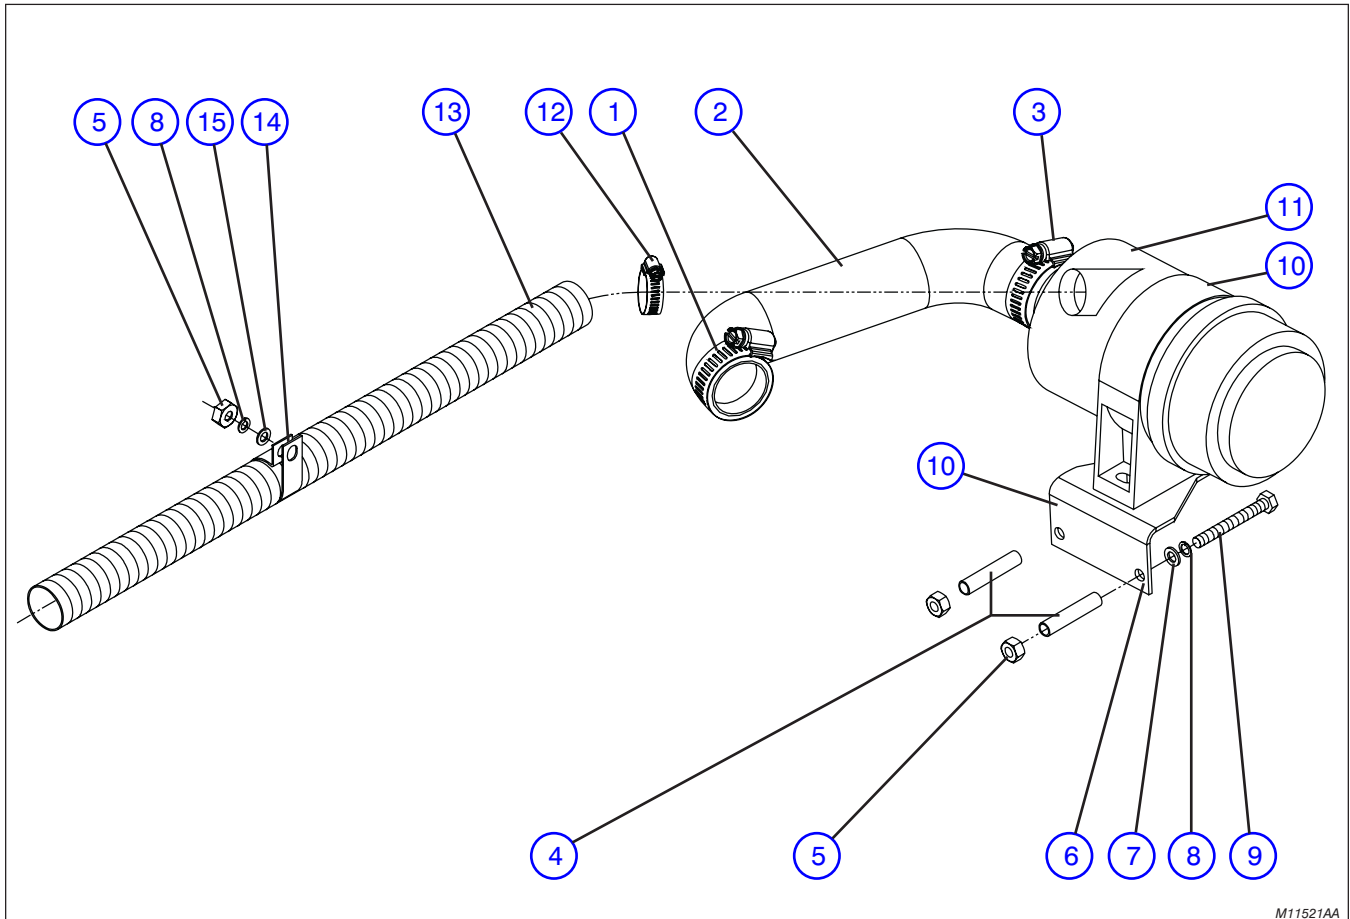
Dual Fuel Engine Assembly (Kubota Engine DF972) (Continued)
